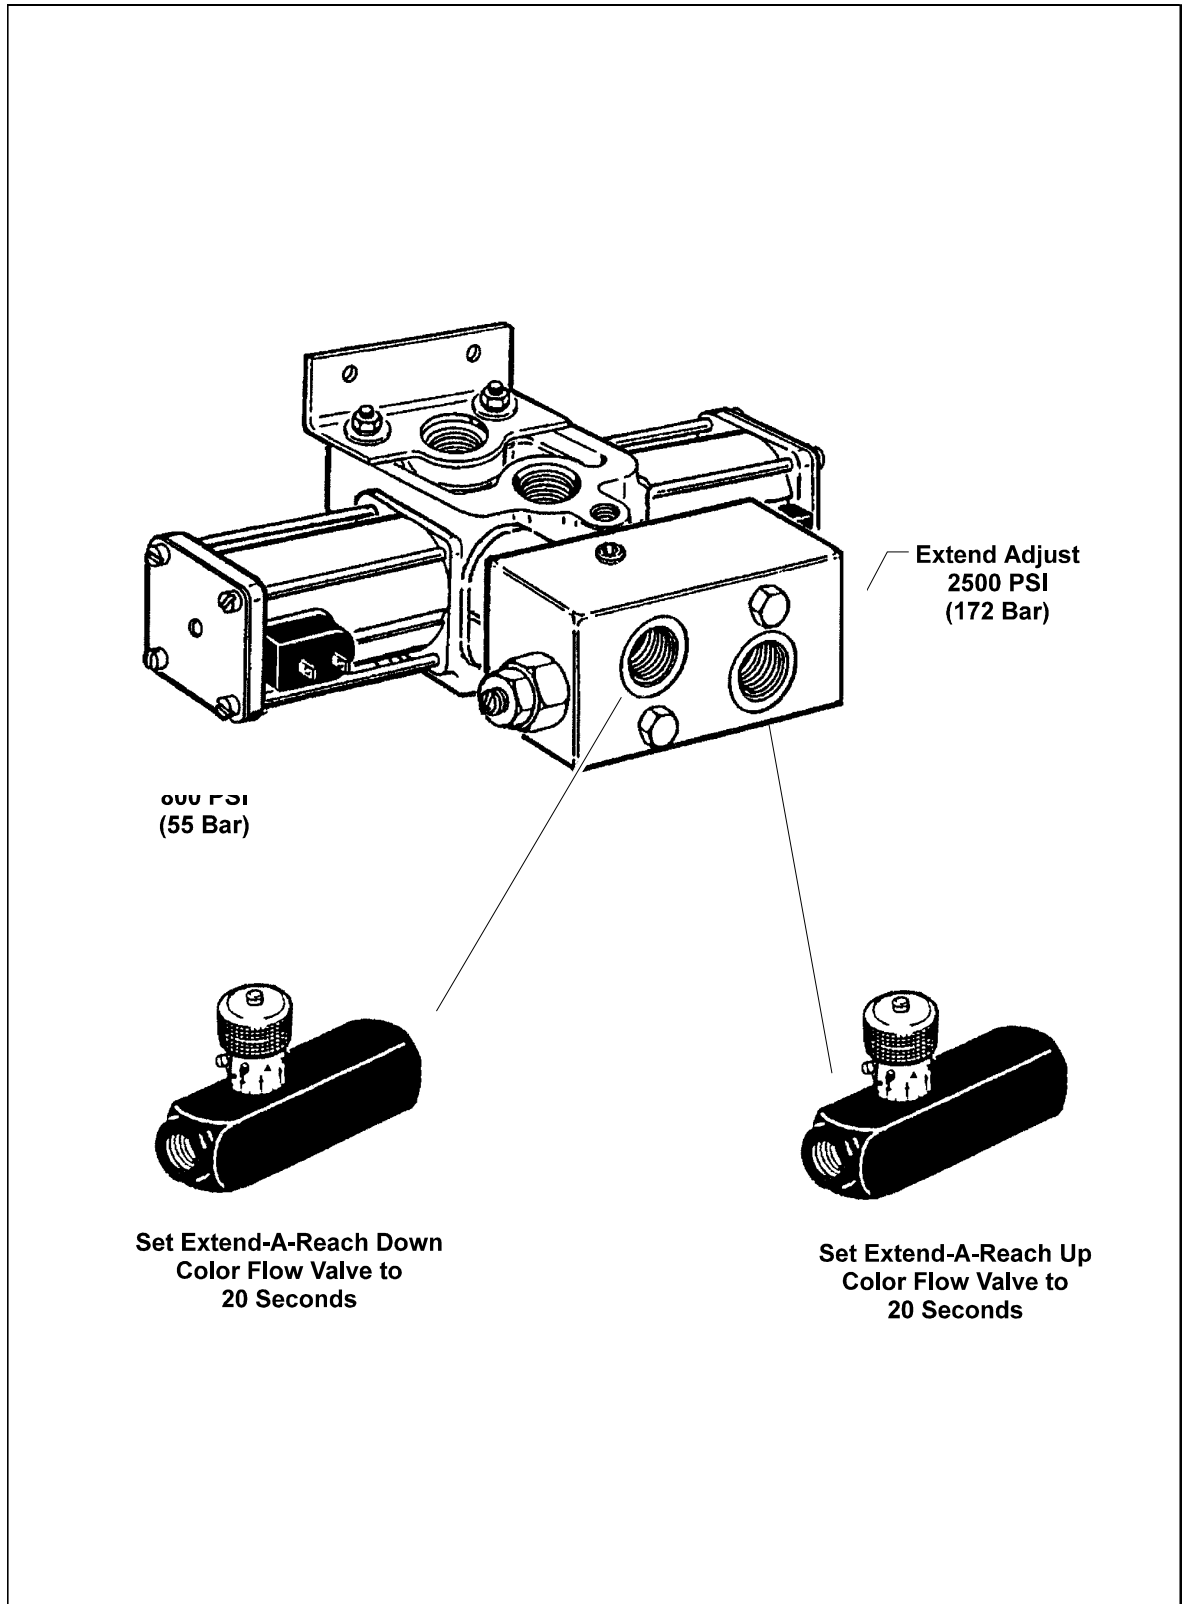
Extend-A-Rich Valve Pressure and Speed Settings
